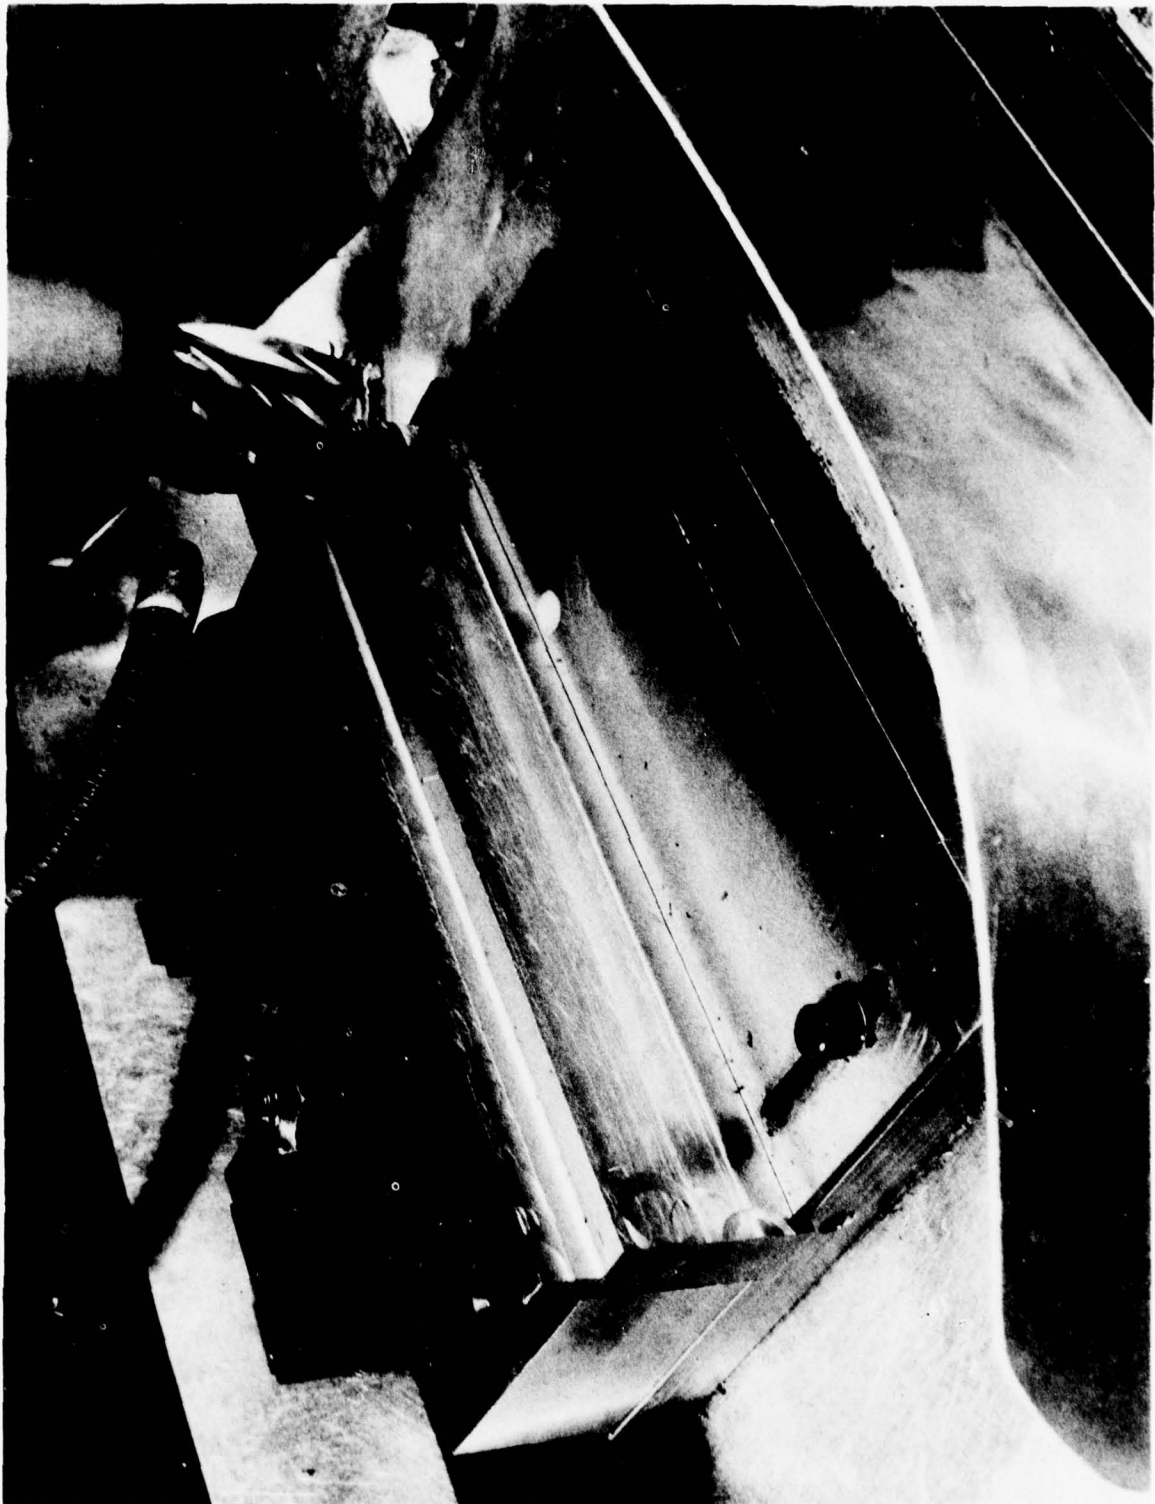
PERIPHERAL END MILLING TEST SETUP
